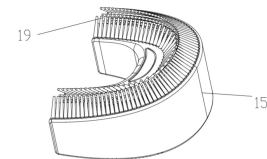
Drawing of patent CN211933032U Integrated U-shaped toothbrush
